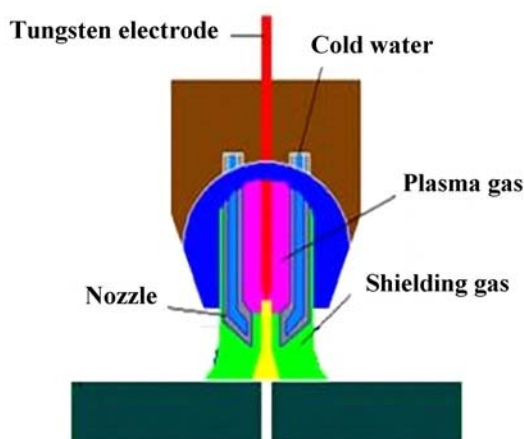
Schematic presentation of the keyhole plasma transfer arc welding system.
